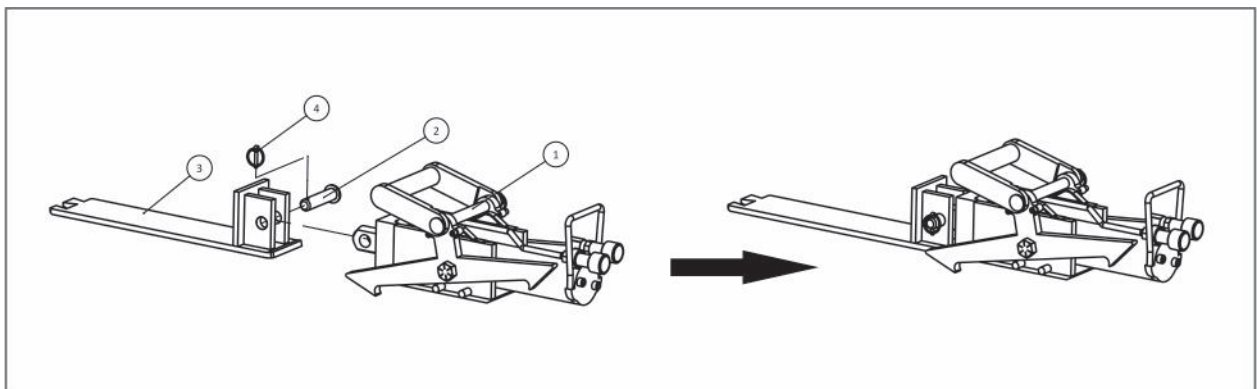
Connecting XLP30 Cylinder Assembly to Push/Pull Head
